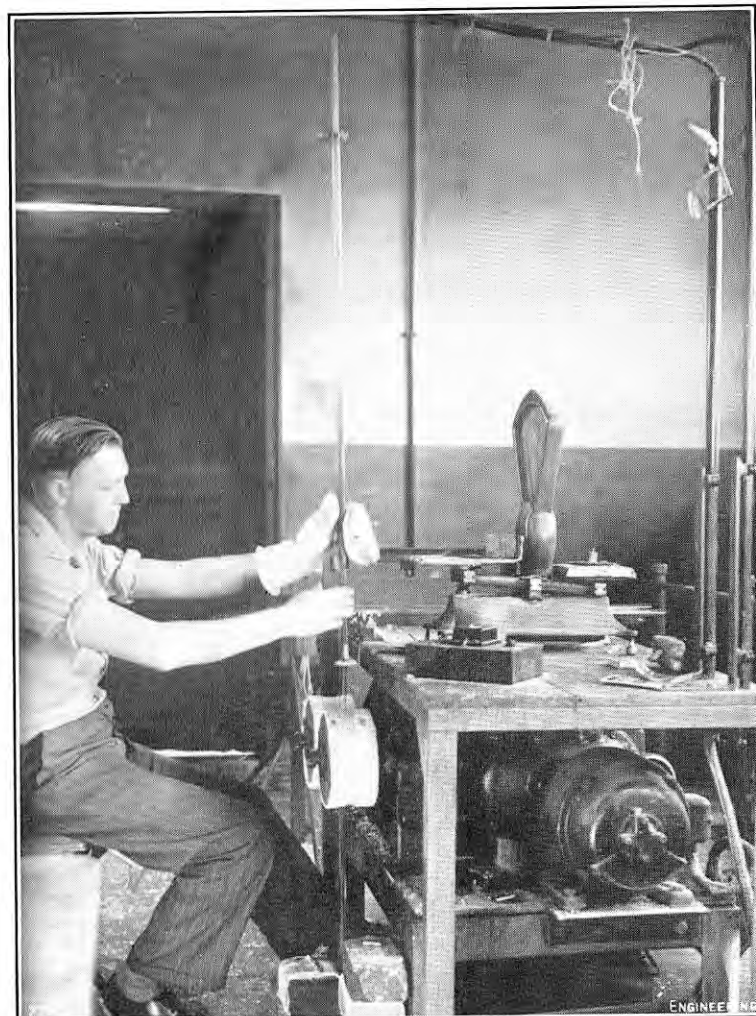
CUTTING-OFF PLATFORM, SHOWING DRAWING ROLLERS.
